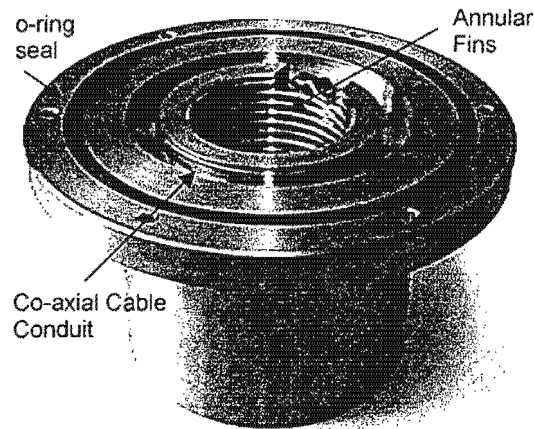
A photograph of the cylinder jacket without the PZT tube. The annular groove is a conduit for the miniature coaxial cable connecting the two modules together. The fins are machined as 6mm deep annular ridges, 1.5mm away from the outside of the tube.
